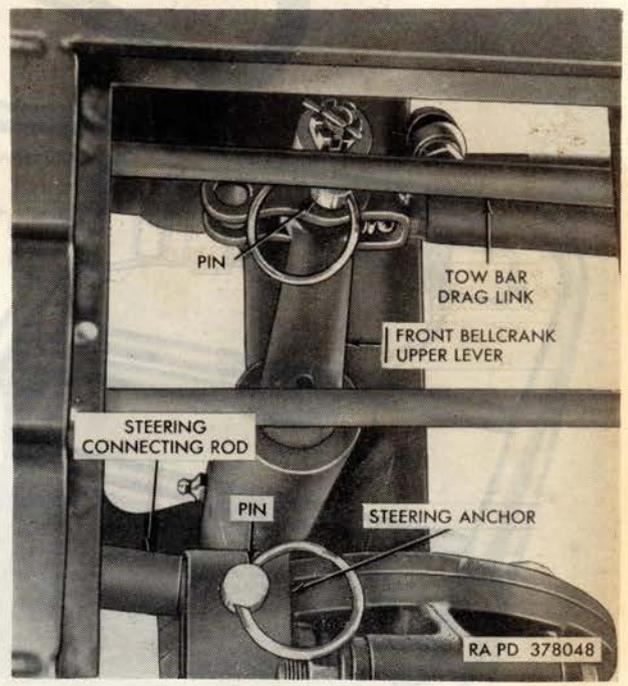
Two- and four-wheel steering connections steering access lid removed and two-wheel steering connected.
